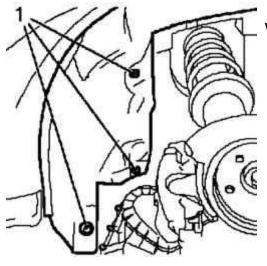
Mounting upholstery wheel arches: 1 - rivets
